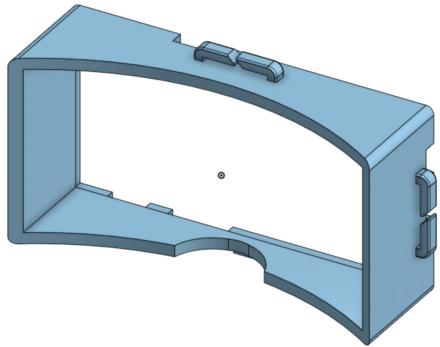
3D sketch of the holder. Once 3D-printed, it allows the users to handle the smartphone without touching the screen and to plug in the headset. It can be used head-worn or hand-held.
